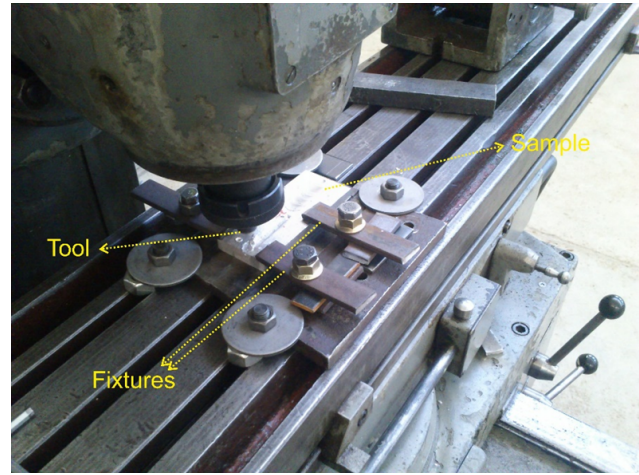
Picture of the specimen fixtures and the FSP machine used in this study.
